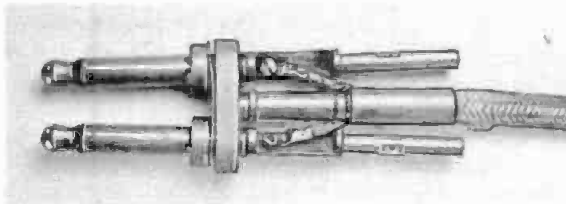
B. Interior view of Western Electric 241A double-circuit patch cord plug.
